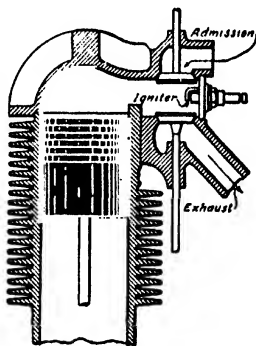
Section of Cylinder Showing Fins Used for Air Cooling
